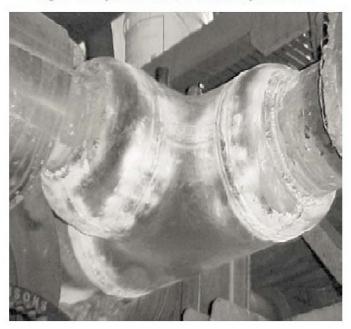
Example of a Welded Leak Box Repair of a Tee
